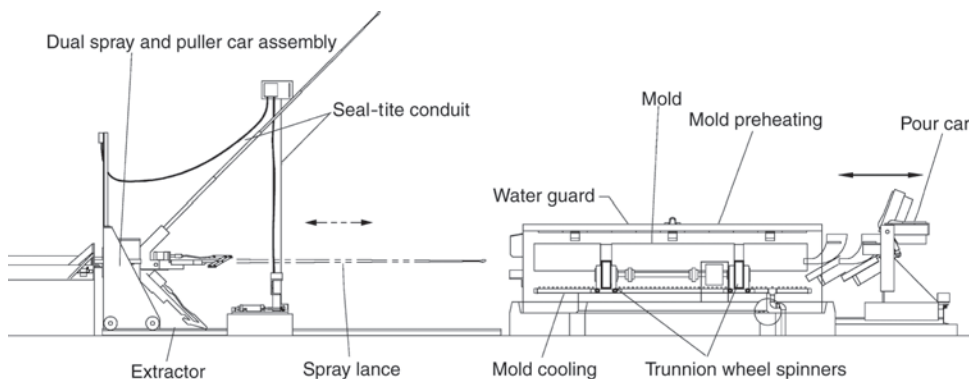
Automated horizontal casting machine. Courtesy of the Centrifugal Casting Machine Company
